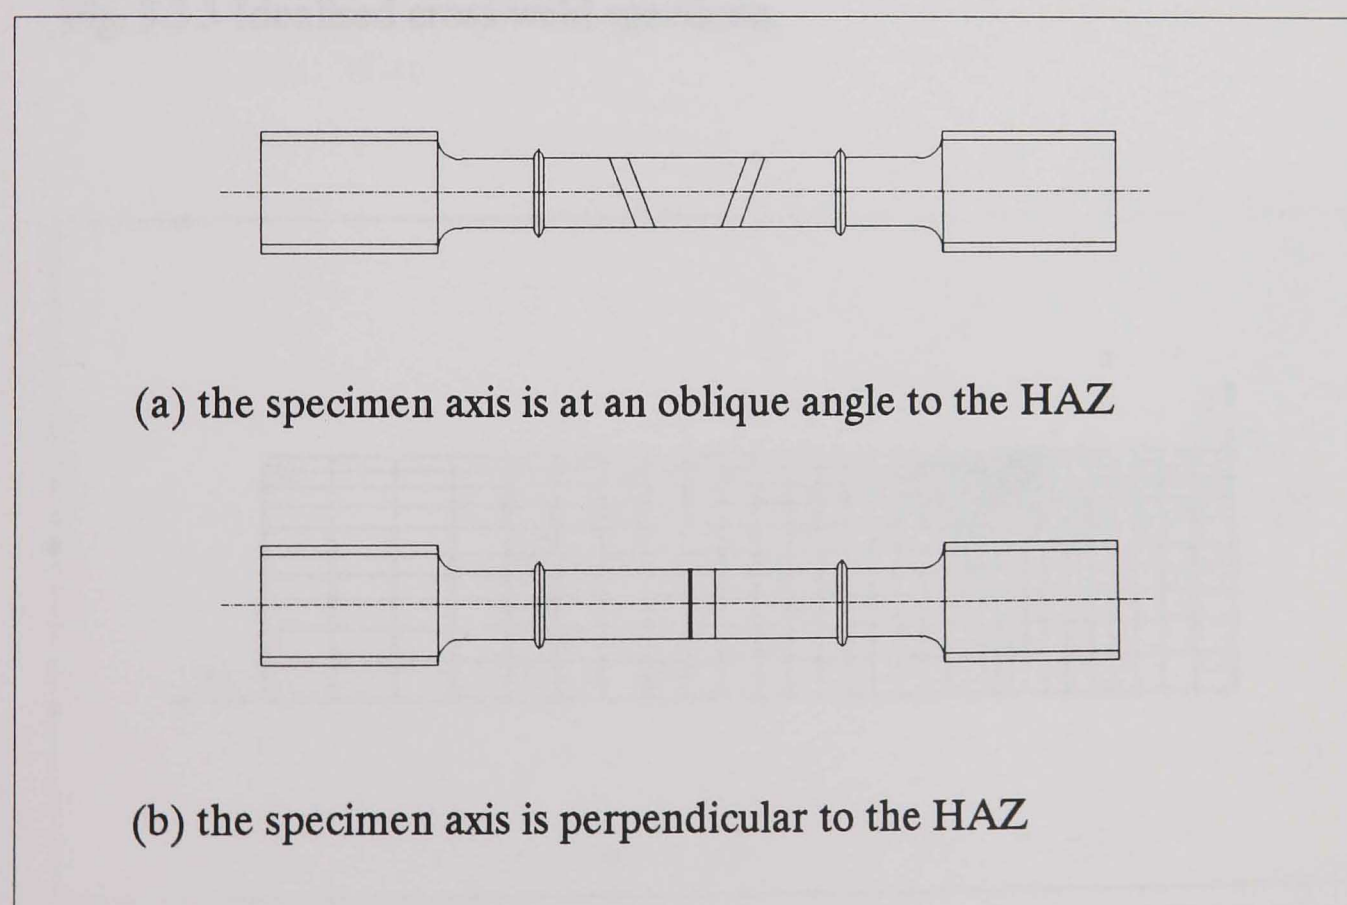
Uniaxial cross-weld creep test specimens.
